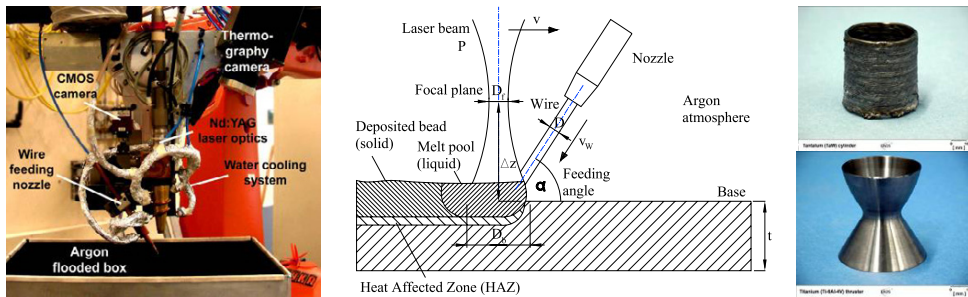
(a) Experimental setup of the WF-L-Beam process; (b) Schematic drawing of the process; (c) Exemplary components: Ta-20W cylinder (as-built surface) and Ti-6Al-4V thruster (machined surface)
